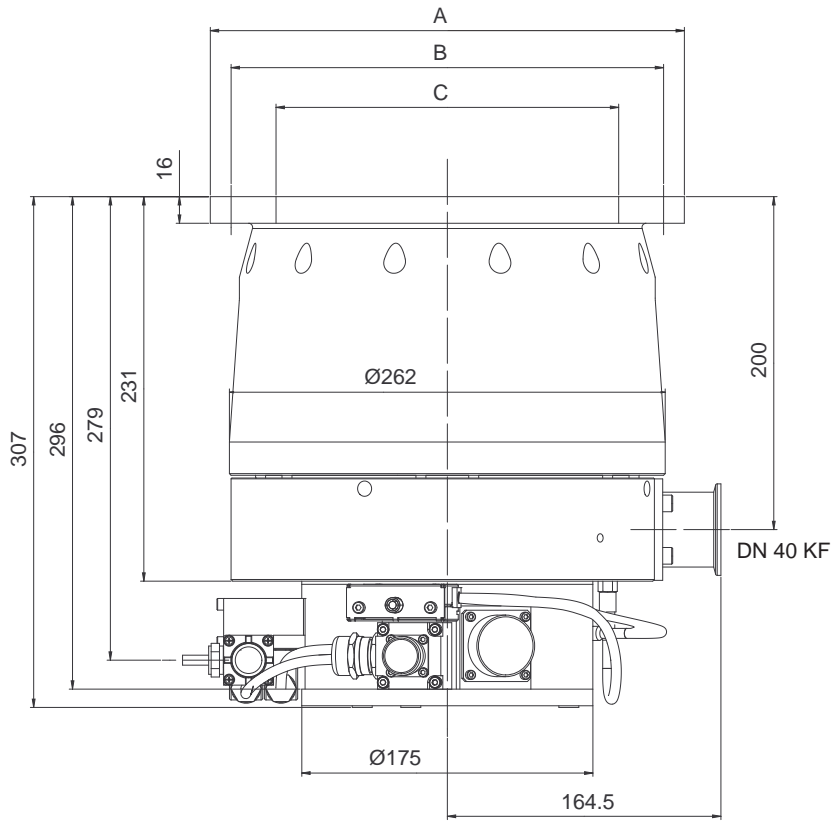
MAG W 830 C and MAG W 1300 C, Dimensions in mm
